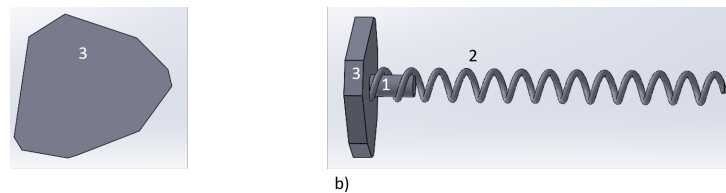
3D modeling of the mechanism that pushes the suturing elements. a) Front view. b) Side view.
